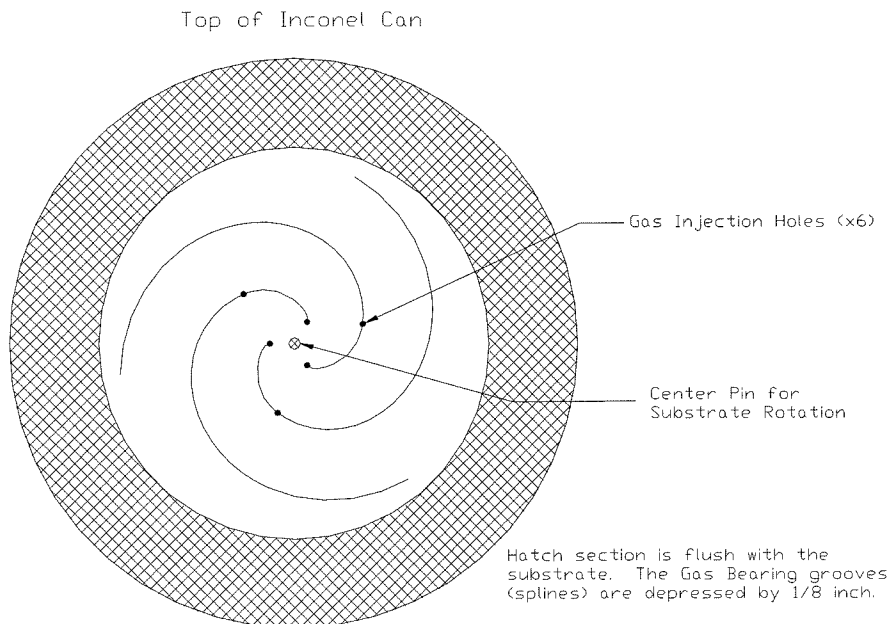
Pictured is a schematic of the gas bearing, as machined into the top of the can.
